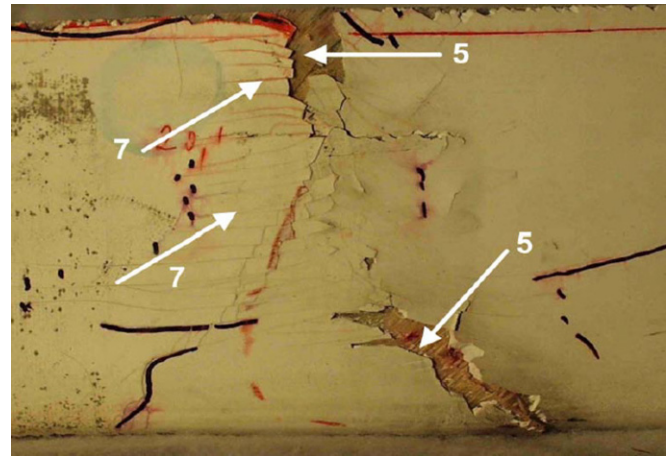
Damage type 5 (laminates failure in compression) and type 7 (gel-coat cracking) at the bottom of the leading edge [18].
